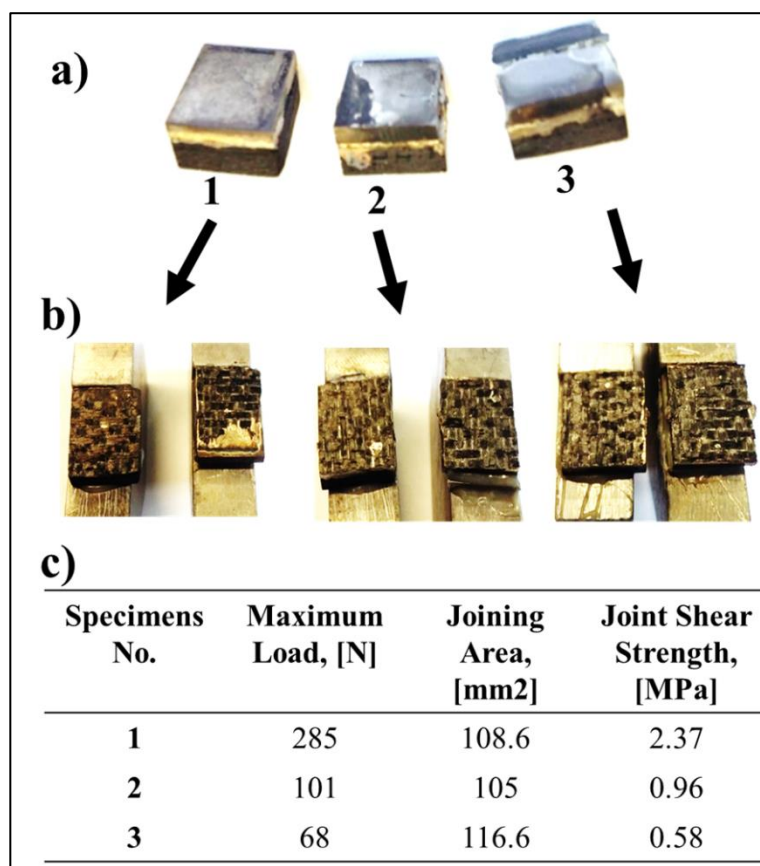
(a) SiC/SiC-Ti6Al4V brazed SL test specimens, (b) post SL test joint surfaces top view, (c) SL test results
